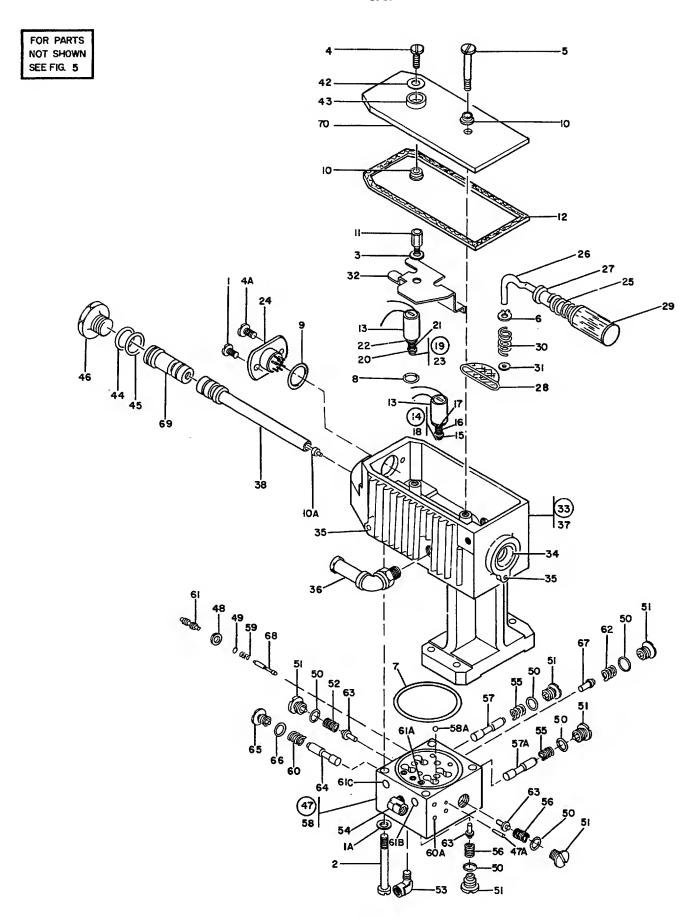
HYDRAULIC ACTUATOR ASSEMBLY. SEE LIST 6.
